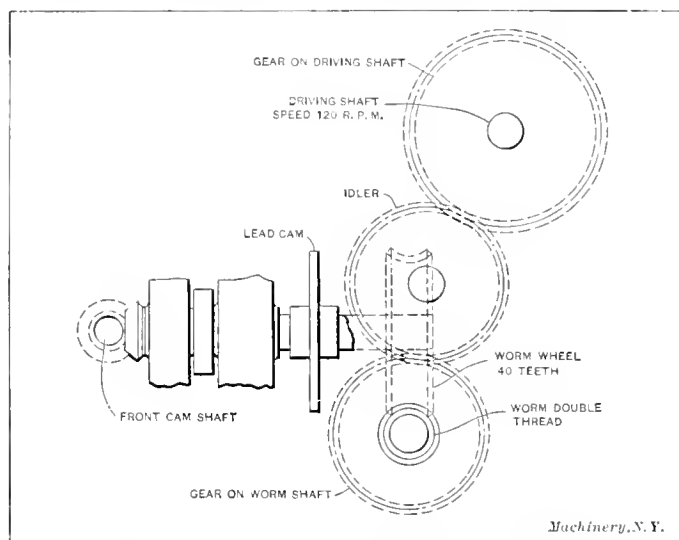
Diagram of Gearing on the No. 00 Brown & Sharpe Automatic Screw Machine
